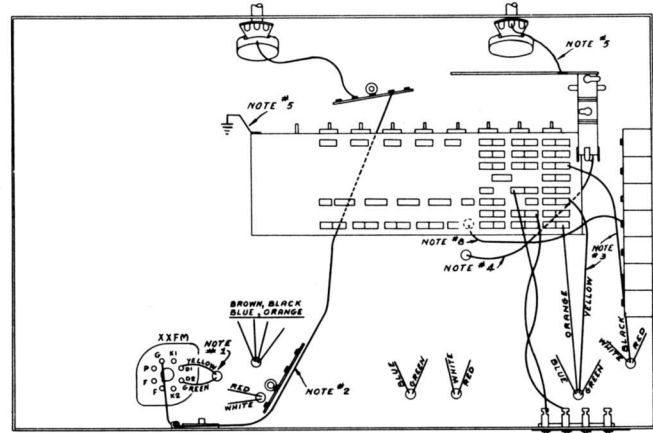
CRITICAL WIRING LOCATIONS, F. M. ALIGNING
